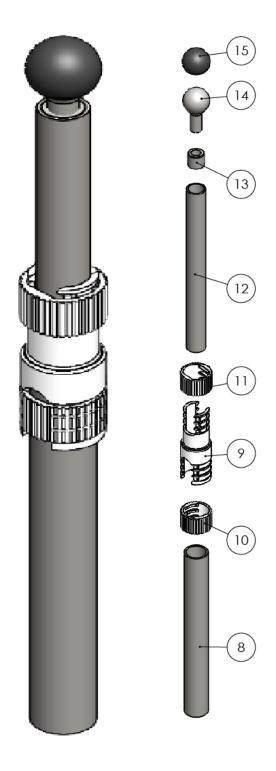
Fixture prototype V6.0 - Telescopic Pole
